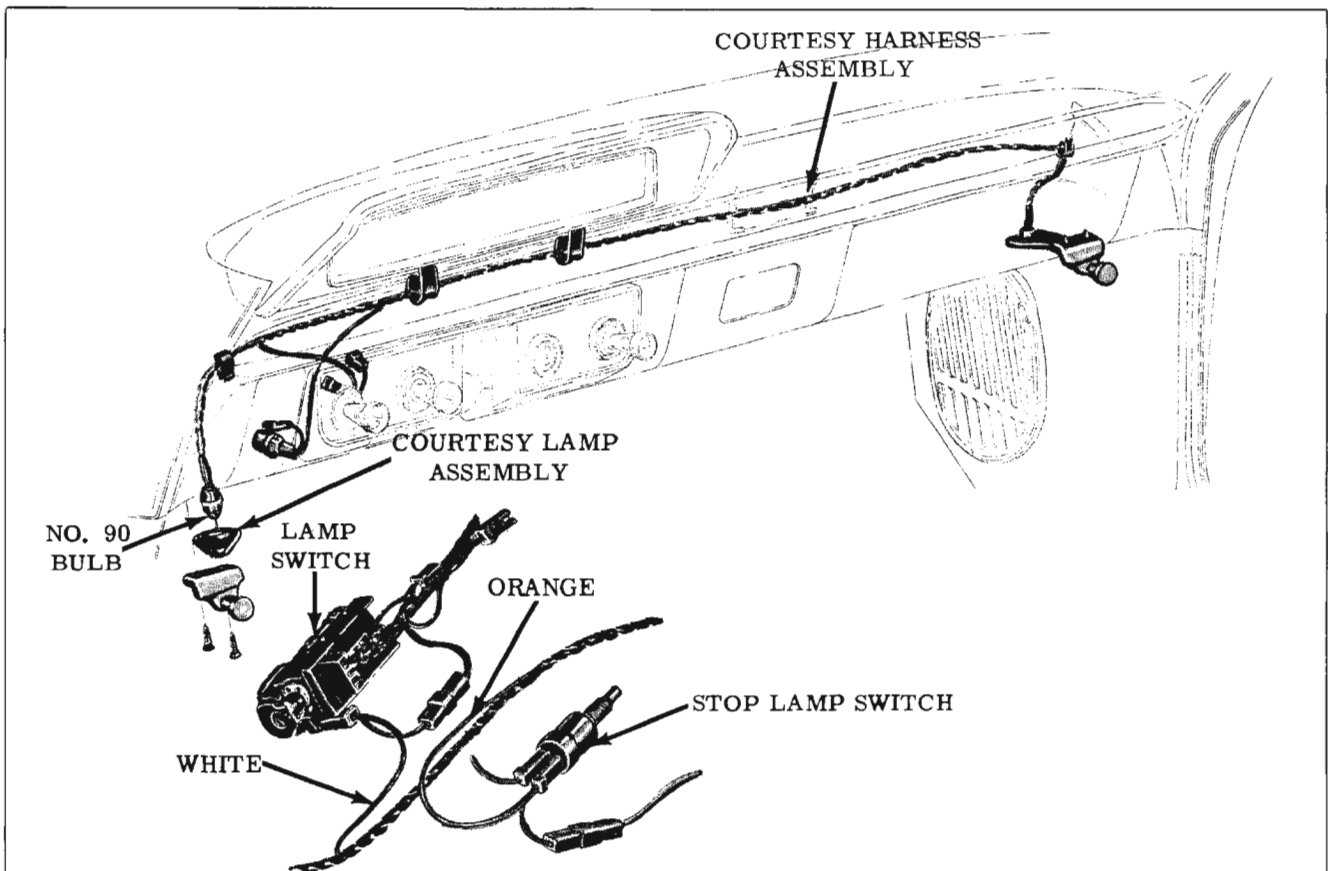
Headlamp Switch and Courtesy Lamp Wiring
